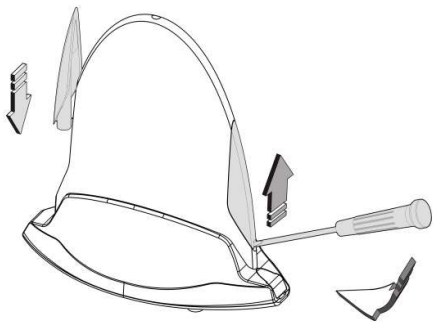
Removal and Attachment of SFL Side Brackets
